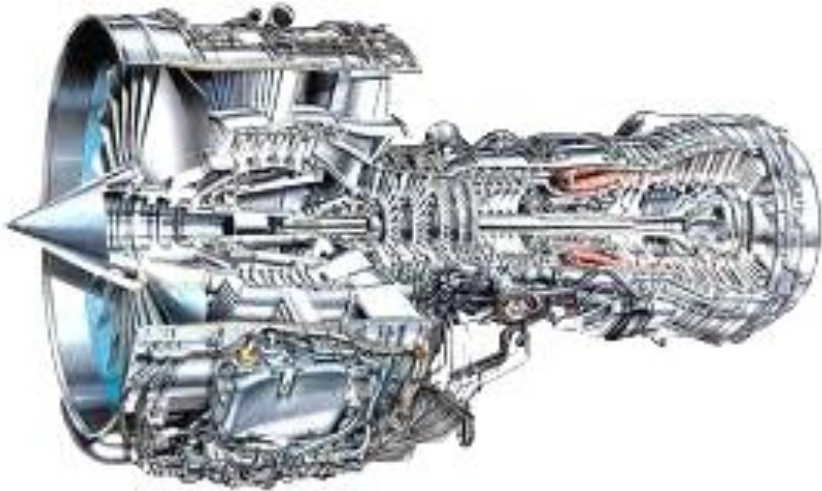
Cutaway drawing of a commercial turbofan engine
